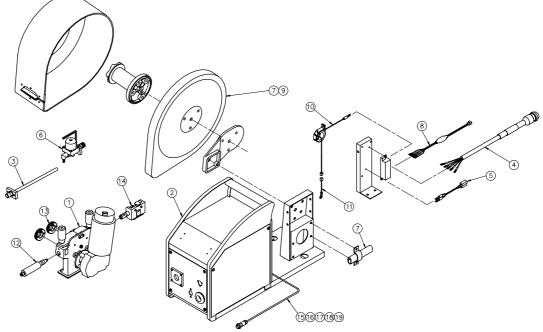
Exploded diagram of wire feeding unit (AFAF-4001)
